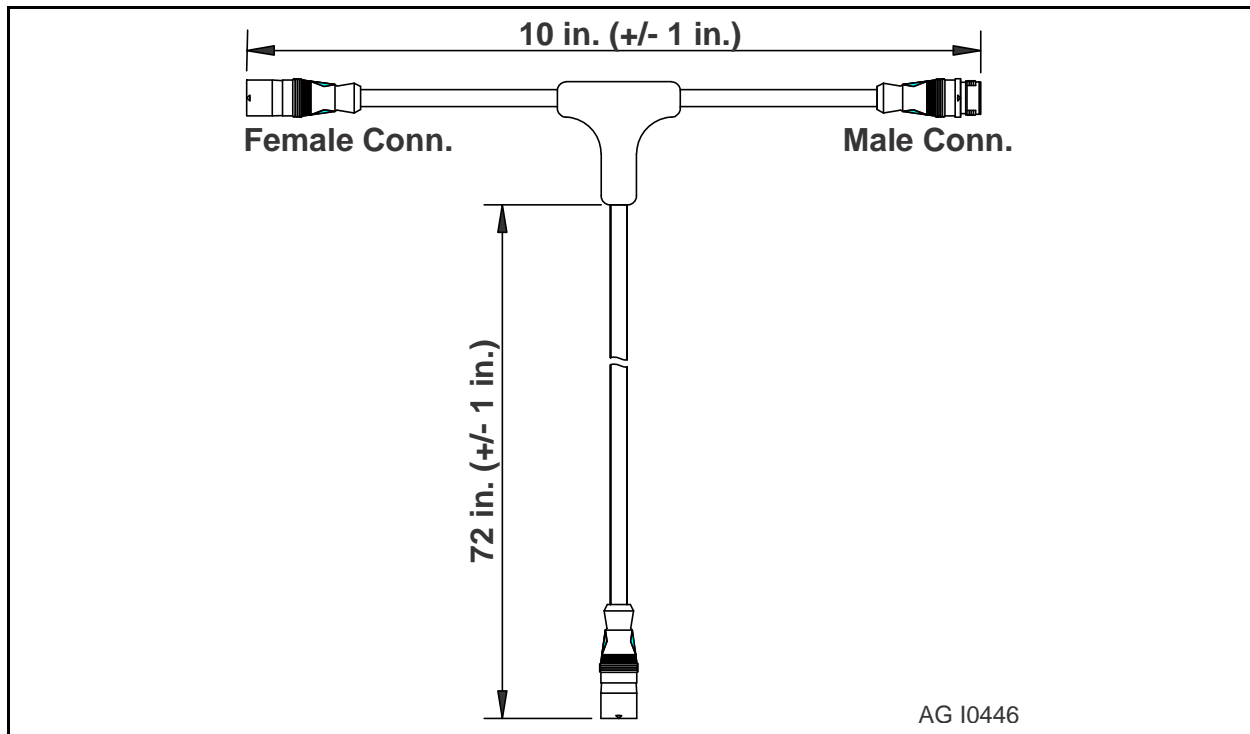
12 Power Tap / Slug Module Cord (T-Cord)
